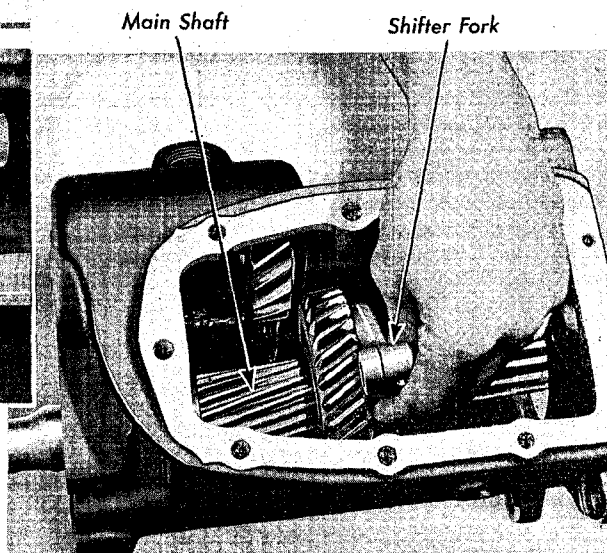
Installing Low and Reverse Shifter Gear and Fork
